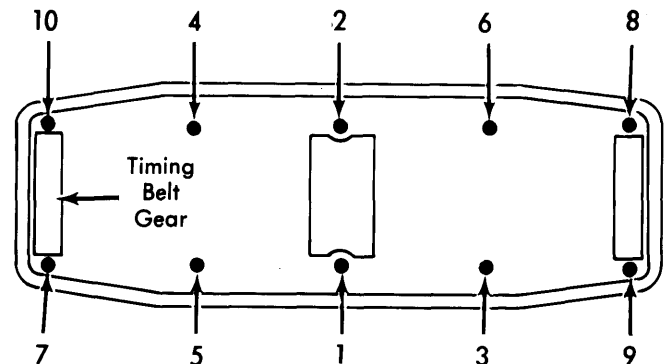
Cylinder Head Tightening Sequence (Loosen in Reverse Sequence)
